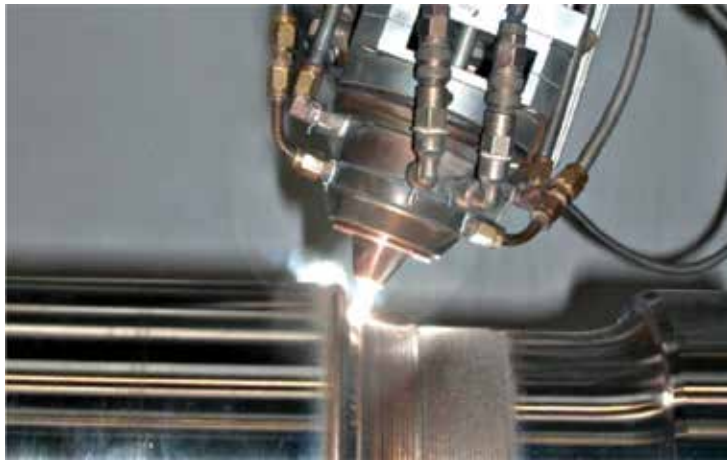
Laser cladding technology of wear-resistant material on shaft surface [18].
